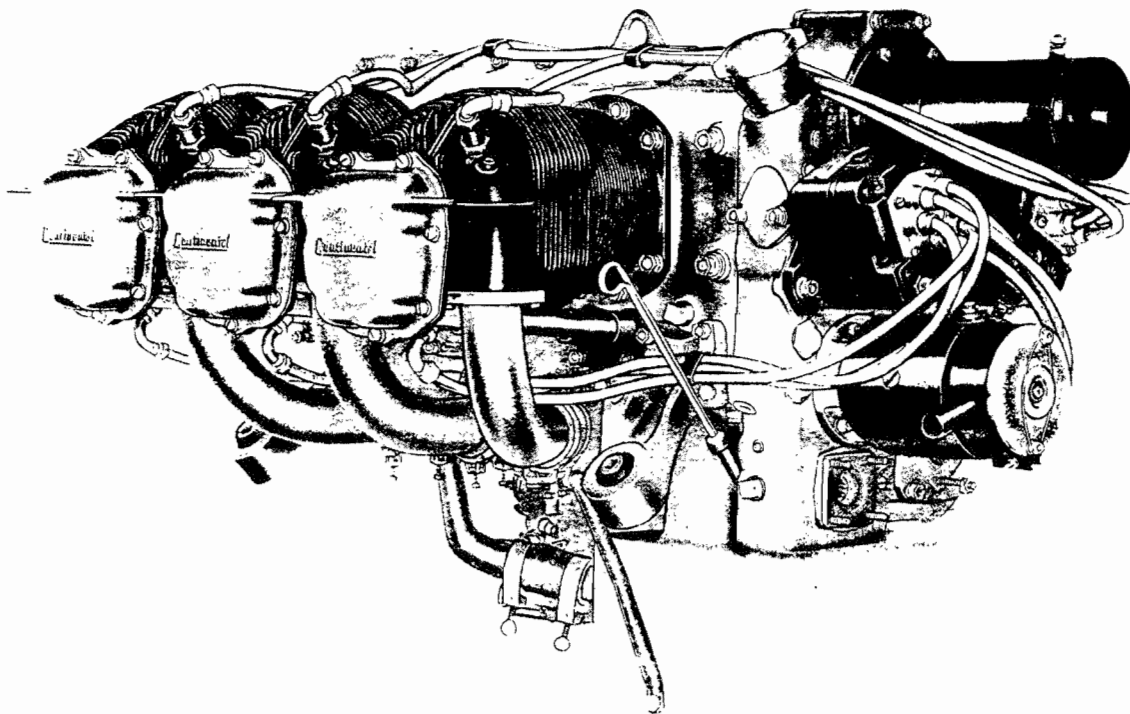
THREE-QUARTER LEFT REAR VIEW TYPICAL OF MODELS E185-9 AND E225-4.
